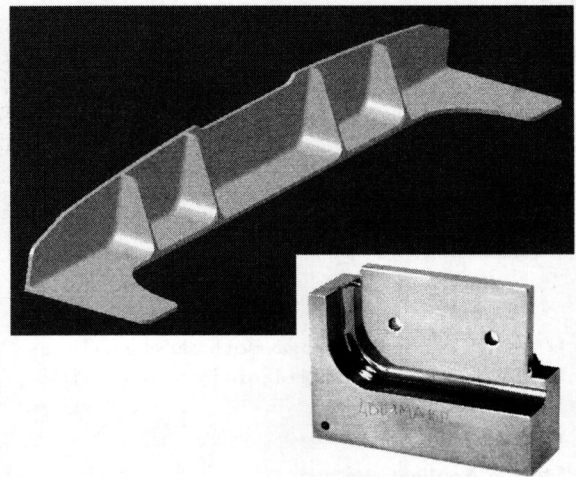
Titanium gusset manufactured by linear friction welding
